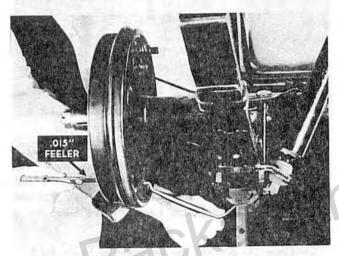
Adjusting the Star Wheel Until α Drag is Felt on the Feeler
